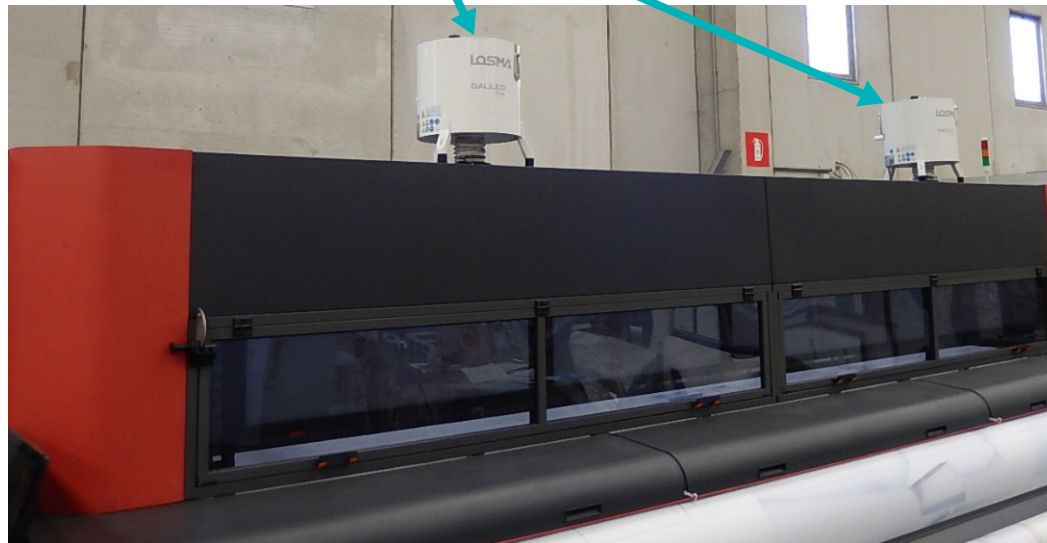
Mist collector install positions, FabriVU 520, Printer Front view
